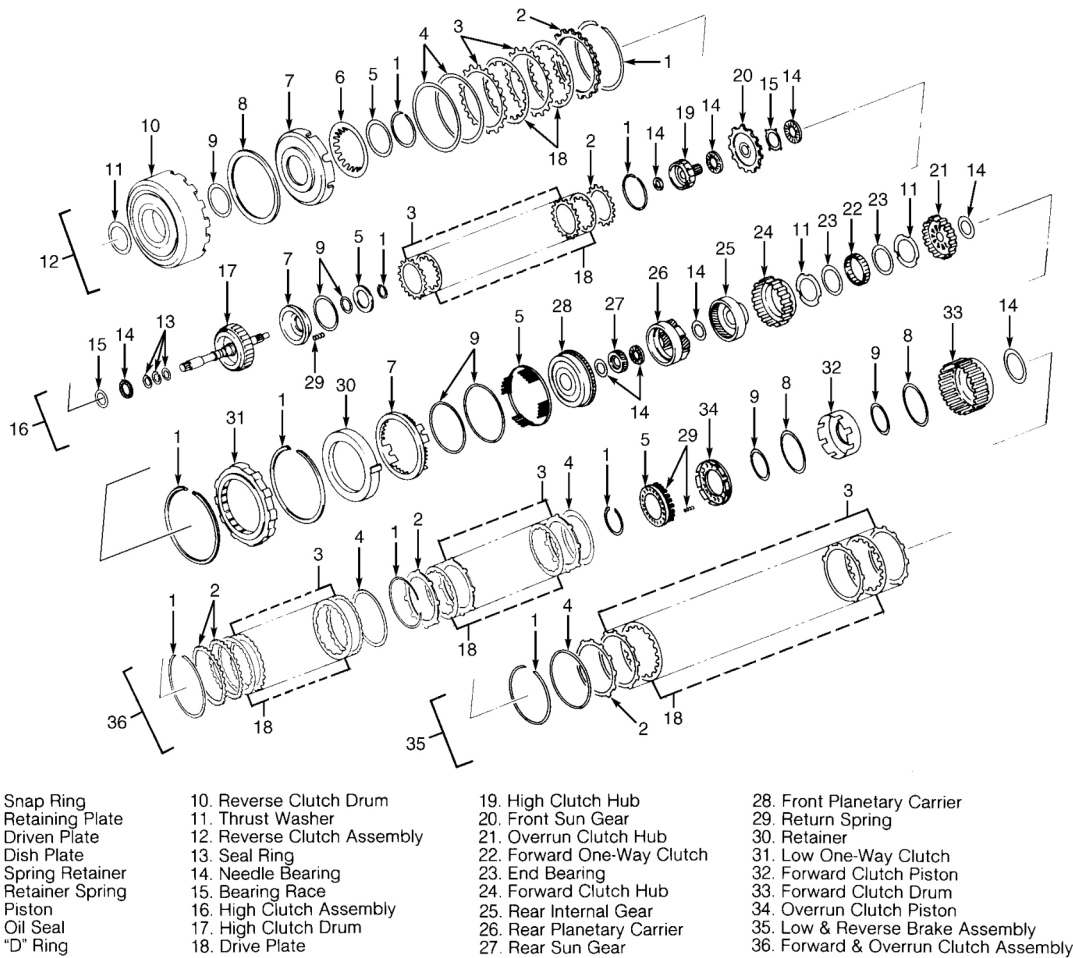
Exploded View Of Forward Clutch, High Clutch, Low-Reverse Brake, Overrun Clutch & Reverse Clutch Assemblies
